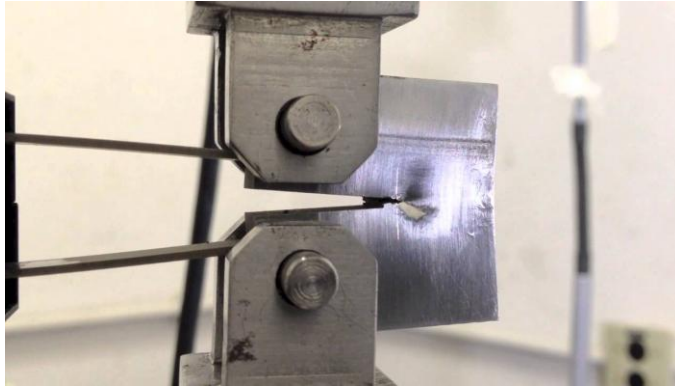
Photograph Showing CT Specimen during Testing on Servo Hydraulic Machine
